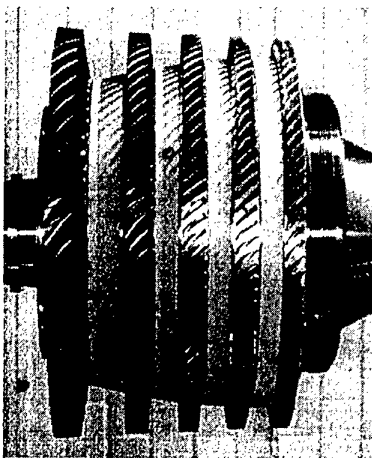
EJ200 5-Stage HP-Compressor, Bladed Rotor
